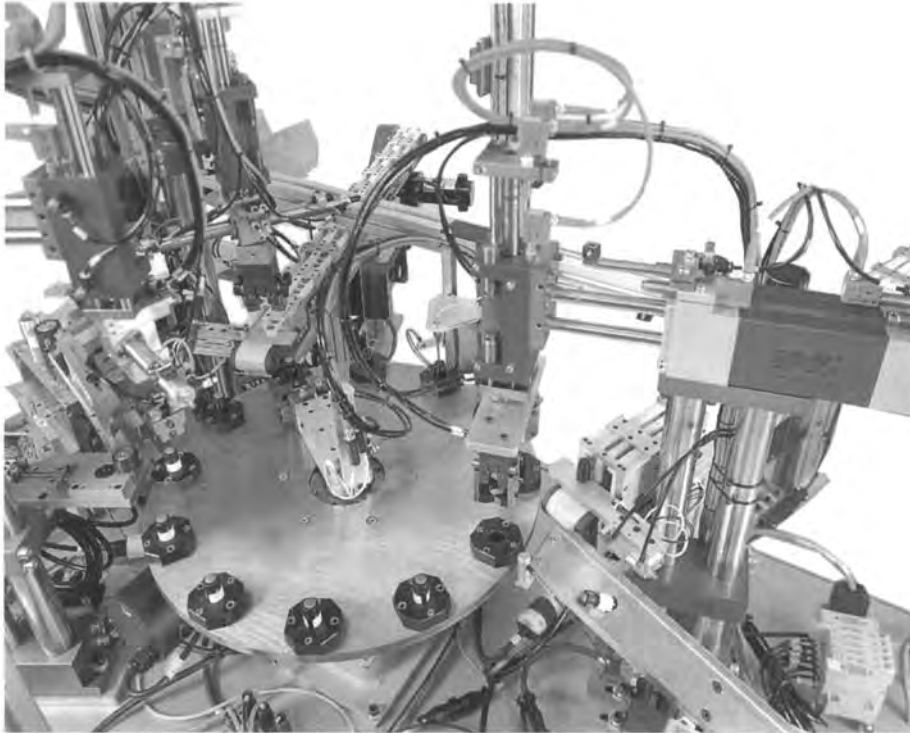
F3b An indexing table arrangement for small assemblies. At each stopping point for the table, as it rotates, a mechanism places a part, fastens it or performs a different operation until the assembly is completed and ejected at another station. Using standard mechanisms, such a machine can be engineered to assemble various different products. (Courtesy Demco Automation.)
